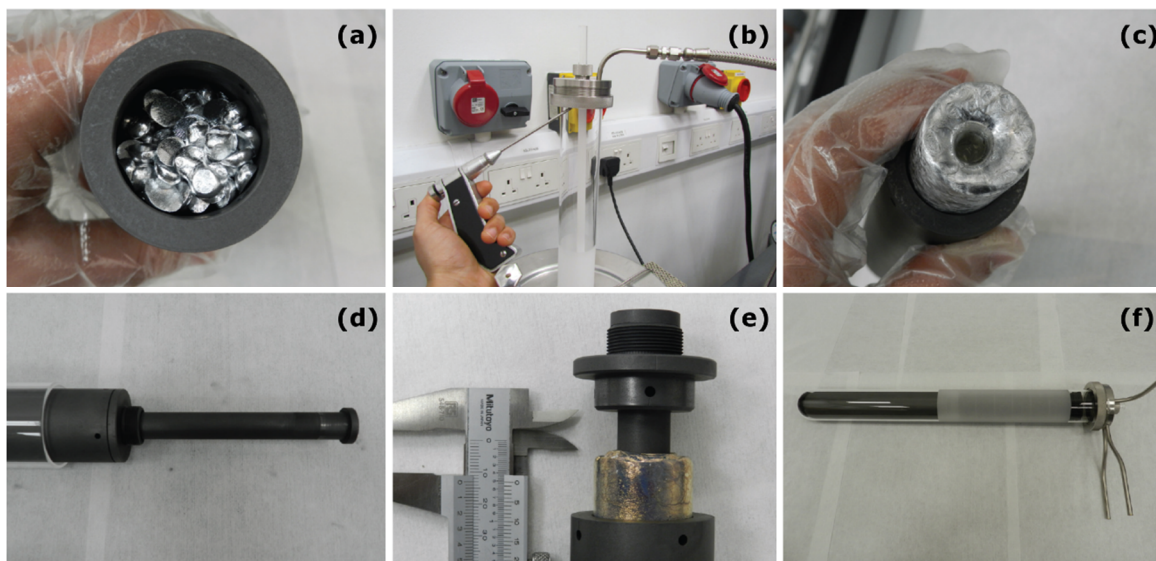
Selected stages of the construction process: (a) initial filling of the crucible with the aluminium; (b) leak testing the assembly containing the crucible before turning the furnace on; (c) inspection of the ingot cast after the initial filling; (d) reassembly of the crucible and insertion of the re-entrant well; (e) inspection of the completed ingot and (f) the cell fully assembled.
